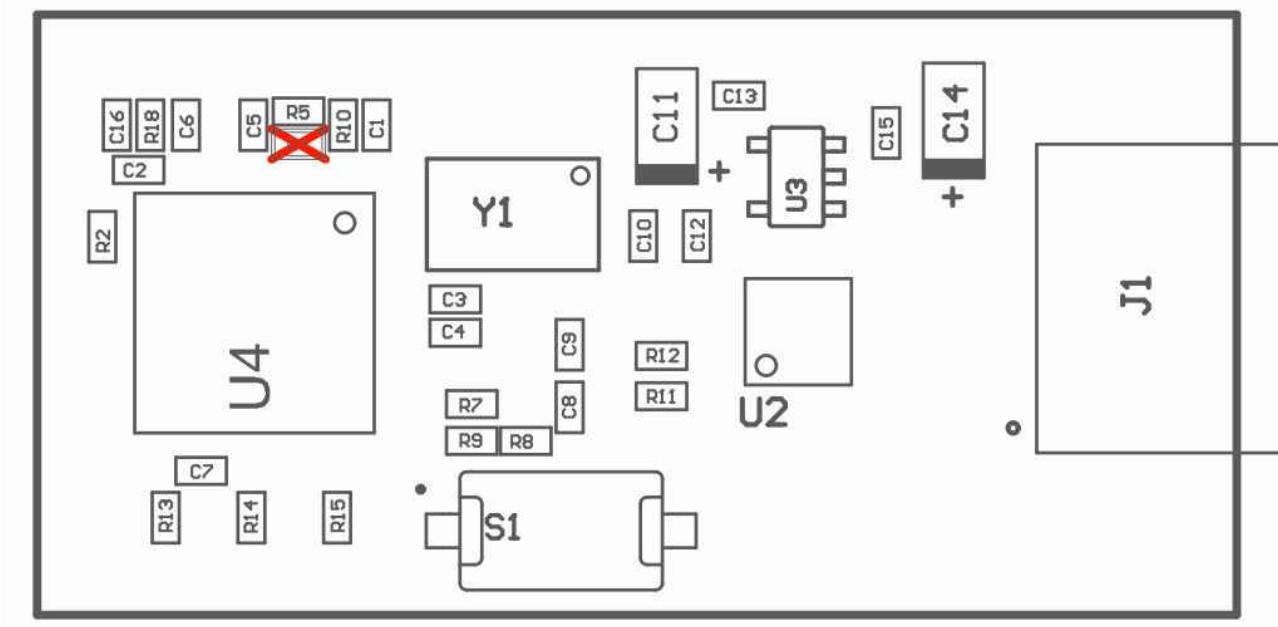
PCB Bottom-Layer Assembly Drawing
